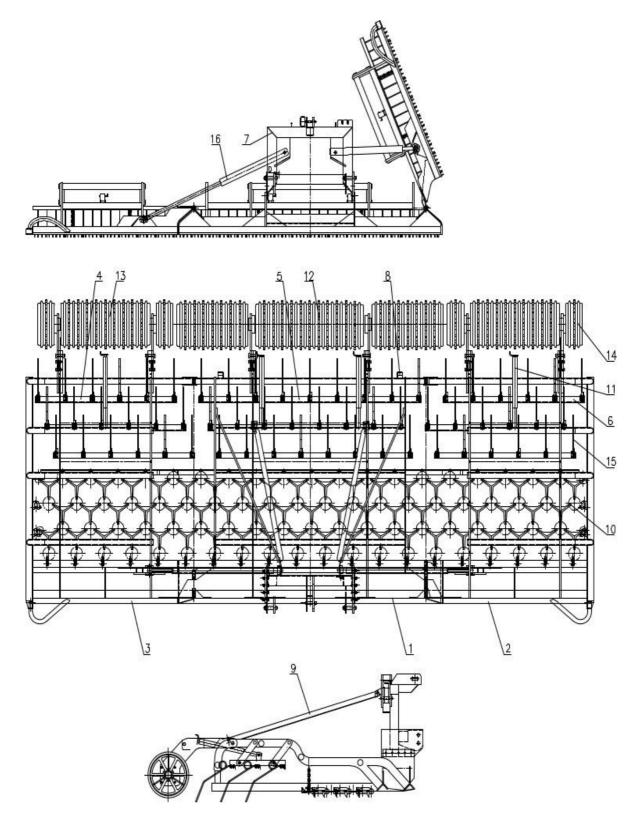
Design of the HYBRO weeder: 1 - central frame, 2 - right side frame, 3 - left side frame, 4 - right side tool section, 5 - central tool section, 6 - left side tool section, 7 - drawbar, 8 - foot, 9 - strip, 10 - weeder grid, 11 - section adjustment mechanism, 12 - central cast iron shaft Ø525, 13 - right side cast iron shaft Ø525, 14 - left side cast iron shaft Ø525, 15 - spring tine, 16 - hydraulics
